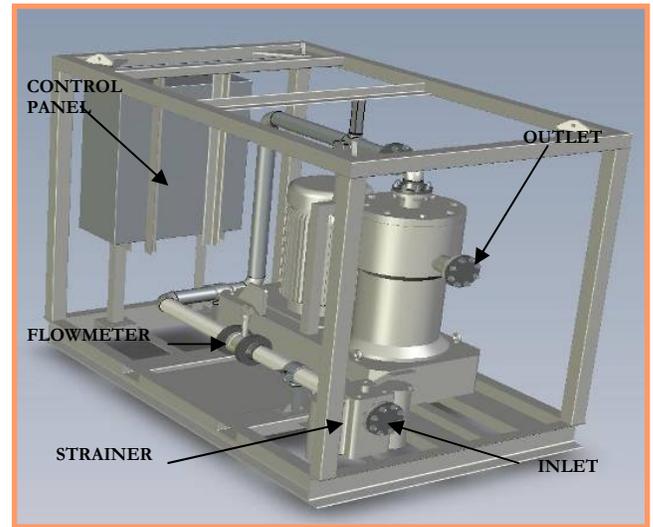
Shearing unit containing multi-stage rotor-stator high-shear mixer.
